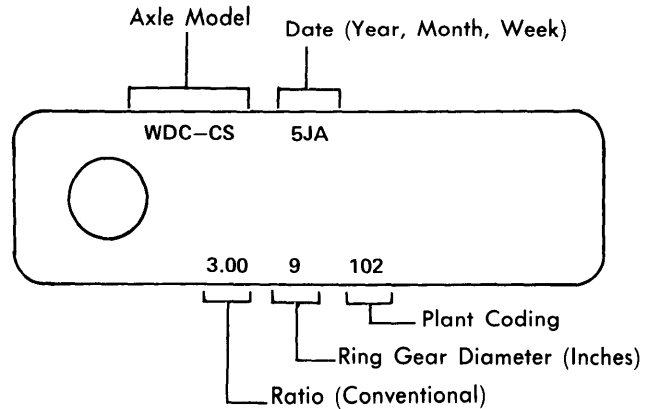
Ford Motor Co. Rear Axle Identification Tag
